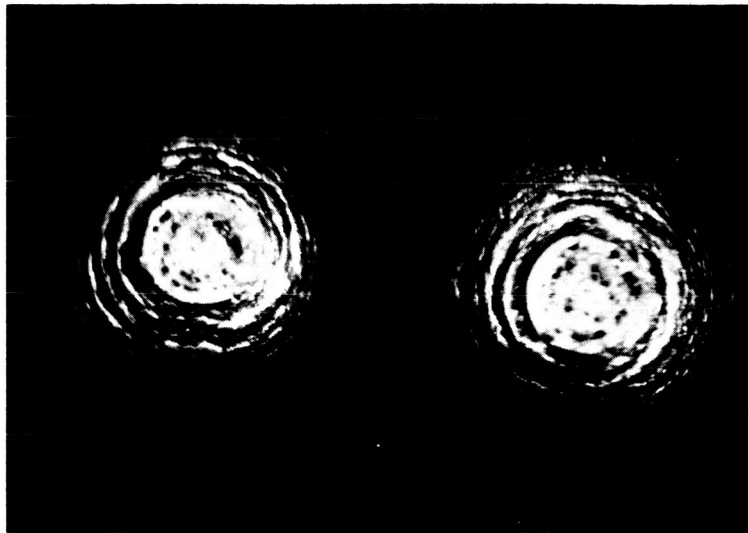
"DOUBLE CUP" TENSILE FRACTURE. (x 15).
